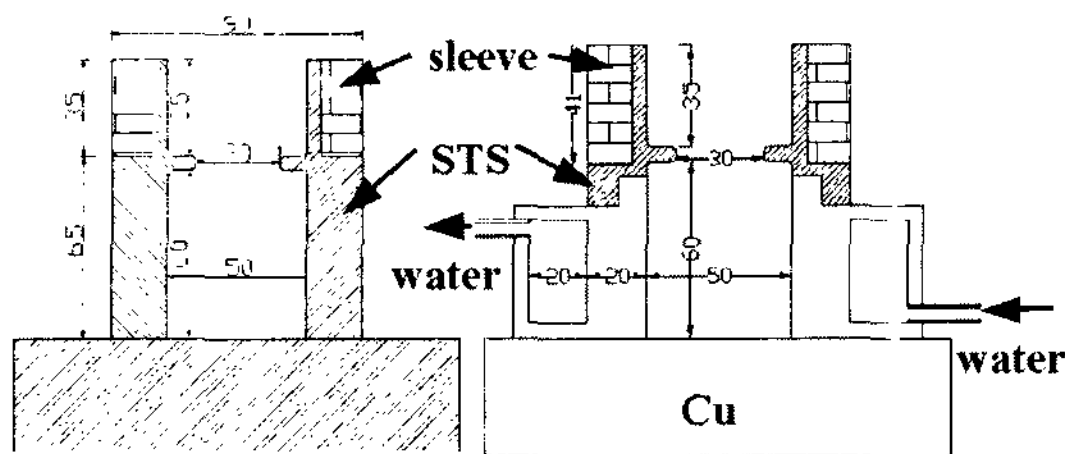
Dimension of a STS and water-cooled Cu mold.
